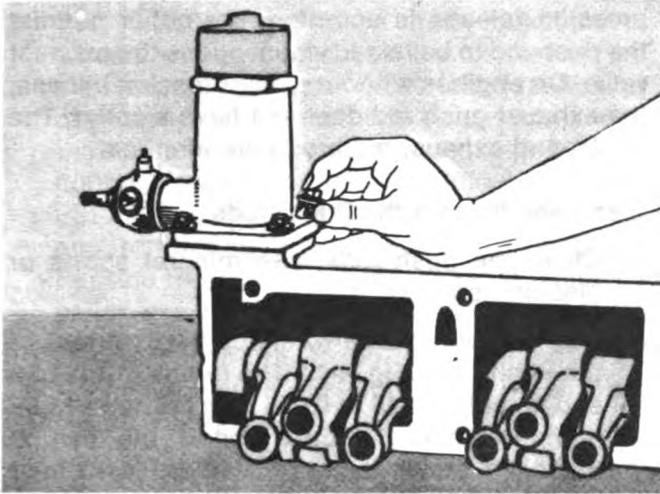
Fasten The Actuator To The Cam Follower Housing.
